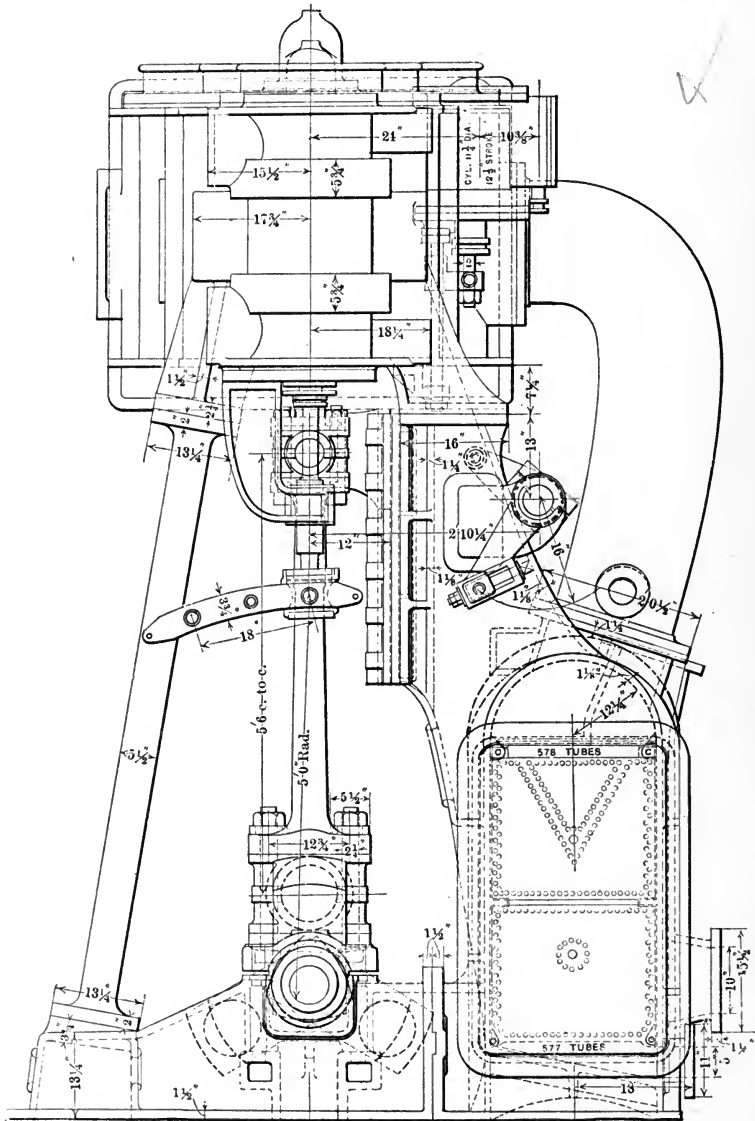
Triple Expansion Engine; End View Showing Condenser in Back Framing.
